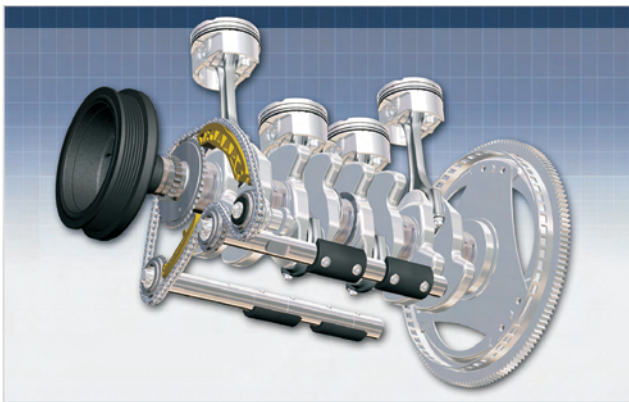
Crank Assembly and Lanchester Balancer of the M271 evo
